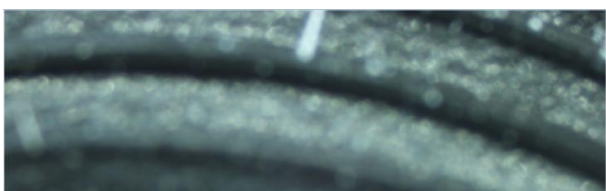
Image of the sealing edge of a new oil burner shaft seal.
